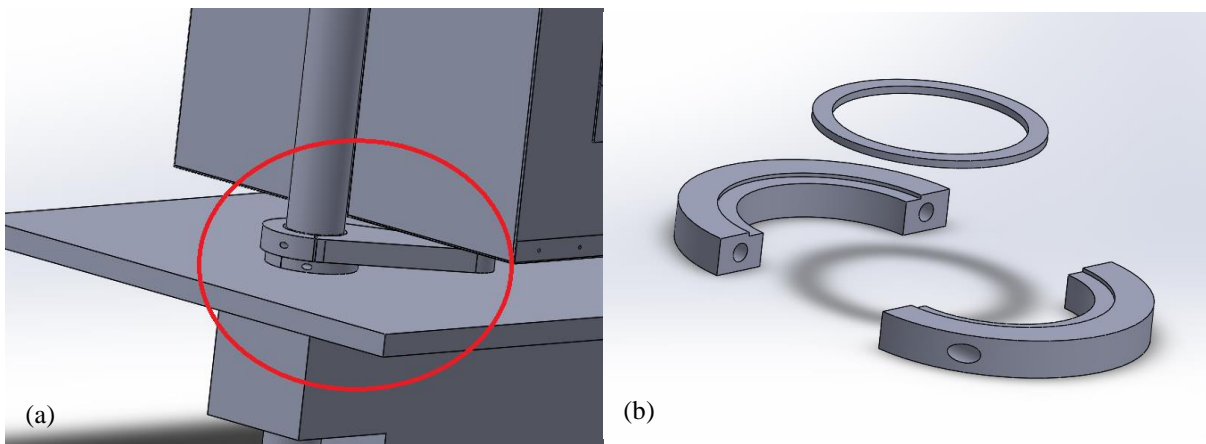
(a) Detail of the spacer; (b) exploded view of the spacer.
